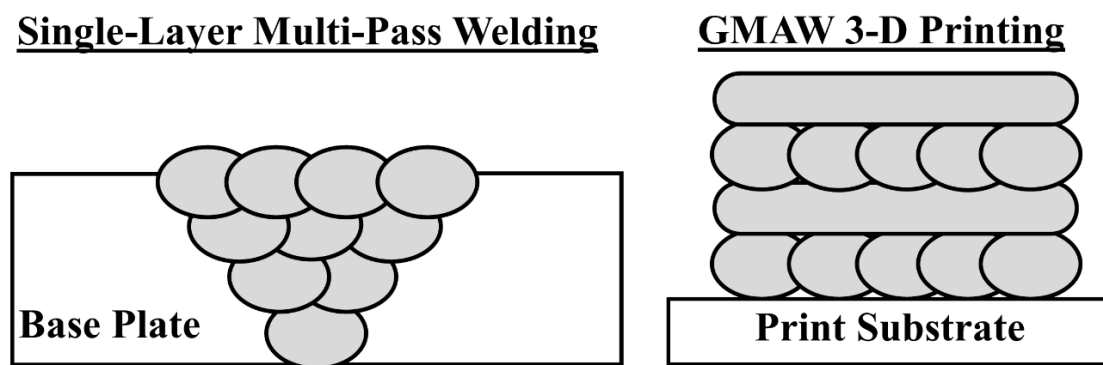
Comparison of single-layer multi-pass welding and GMAW-based 3-D printing Welding schematic (left) and 3-D printing (right).
